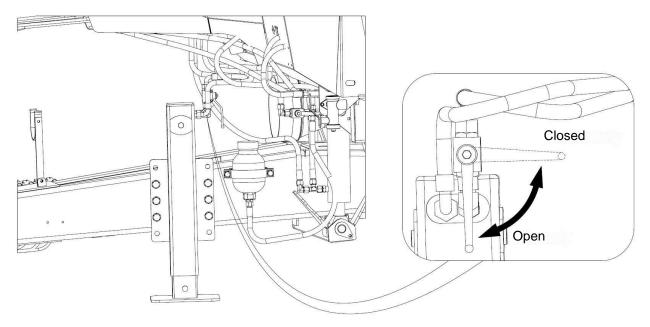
Hydraulic valve to control (shut off) the hydraulic parking jack
